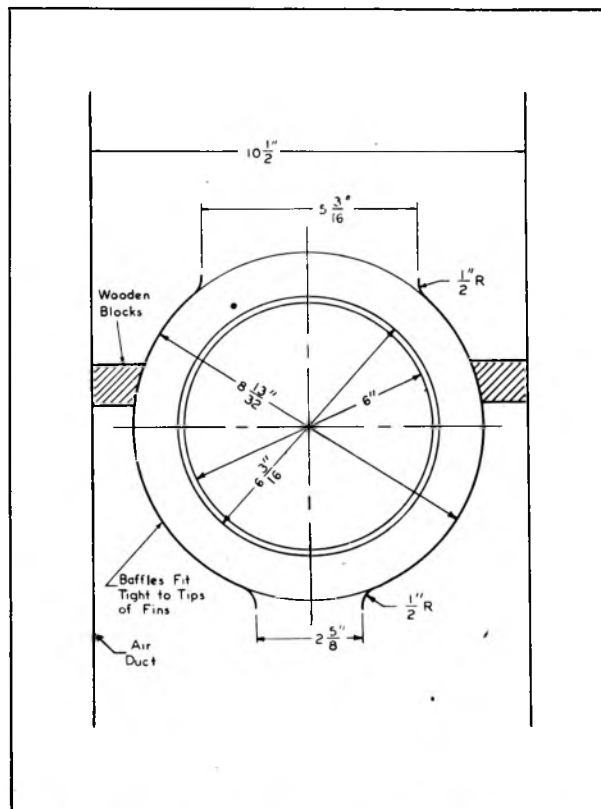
PLAN VIEW OF FIN-AND-BAFFLE ARRANGEMENT
